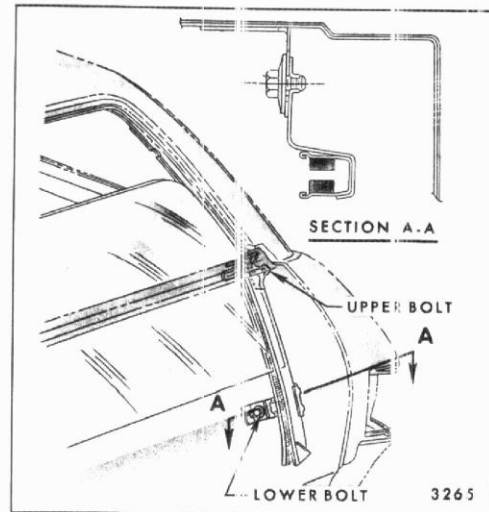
Tail Gate Lower Glass Run Channel Attachment
